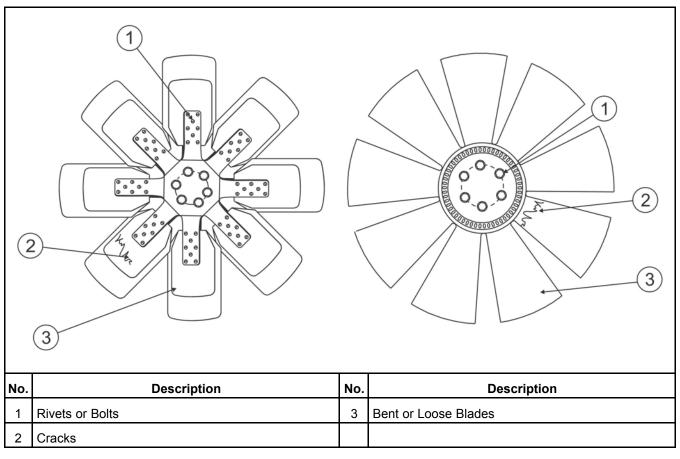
COOLING FAN INSPECTION CHECKPOINTS
